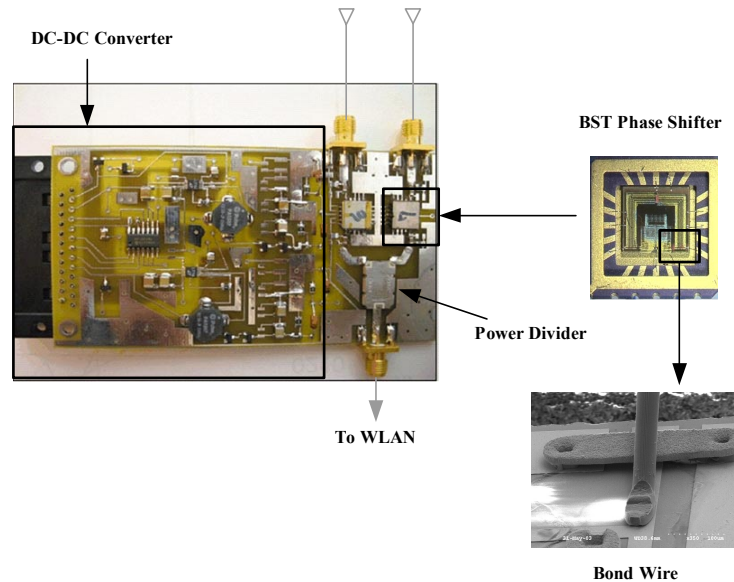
Photograph of the BFN, packaged phase shifter, and bond wire.
